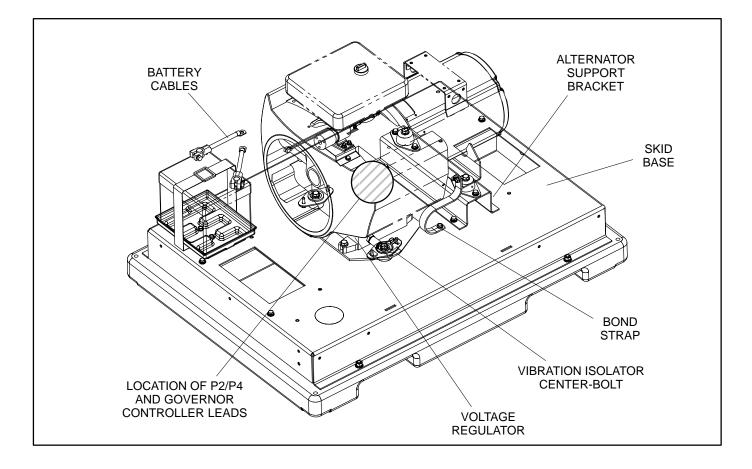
ENGINE/GENERATOR ASSEMBLY
